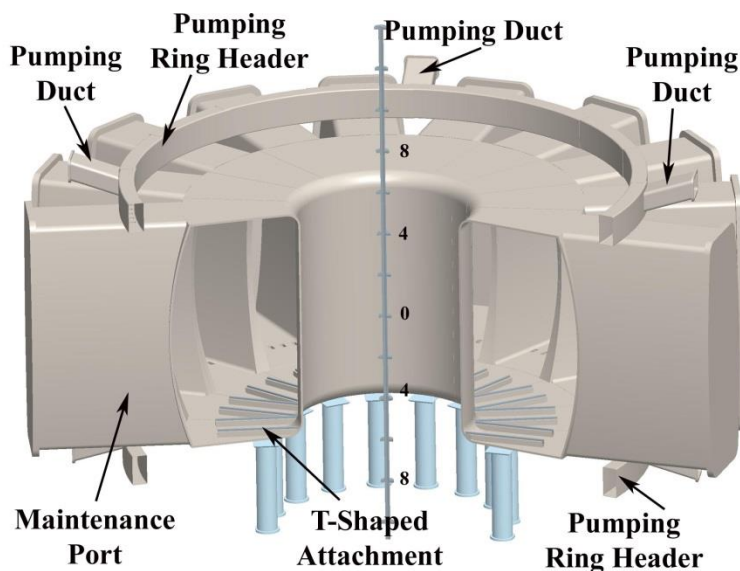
Schematic view of the ARIES-ACT1 vacuum vessel showing location of maintenance ports for removal of power core segments. Centerline dimensions are in meters.
